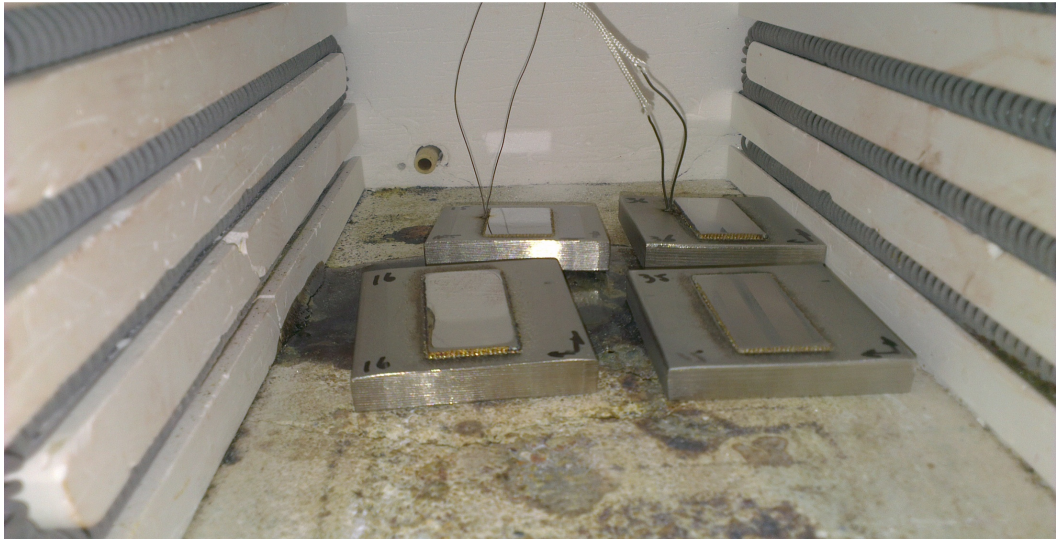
Thermocouple arrangement for the post-weld heat treatment of test coupons.
